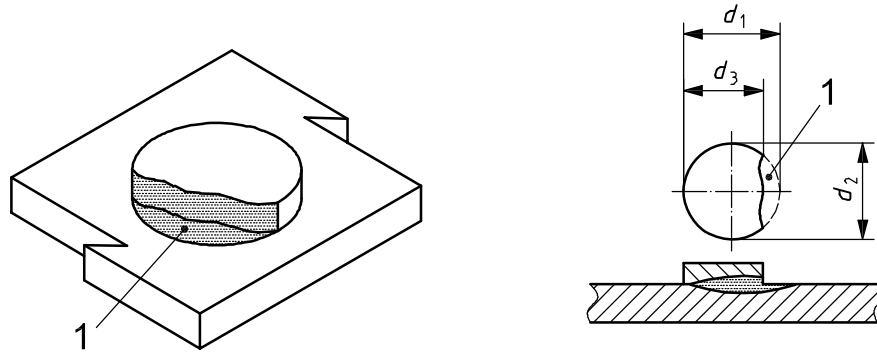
Measurement of weld size — Weld with interface failure
